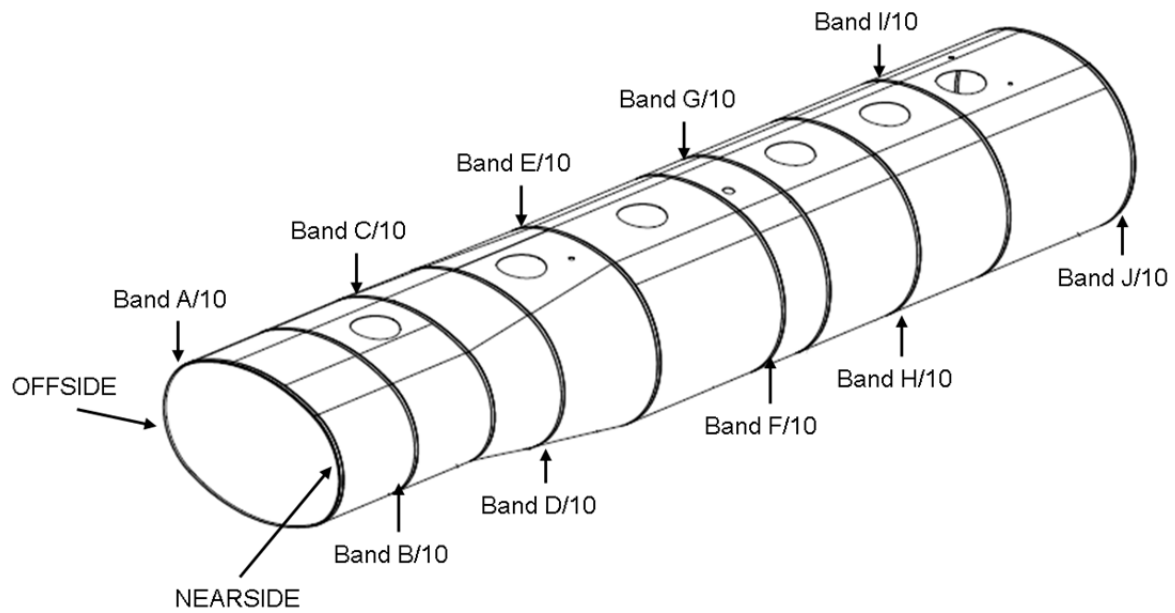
Isometric view of Tanker J3857 reproduced from GRW engineering drawing (2008). This view shows the offside (driver's side) and nearside.
